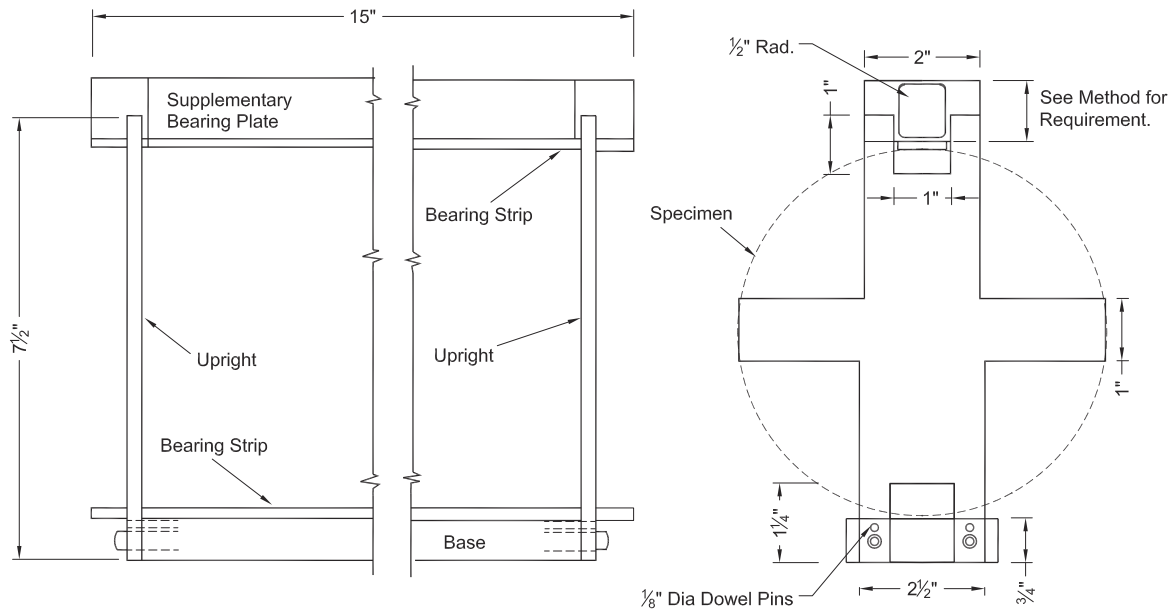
Detailed Plans for a Suitable Aligning Jig for 6 by 12 in. (152 by 305 mm) Specimen
